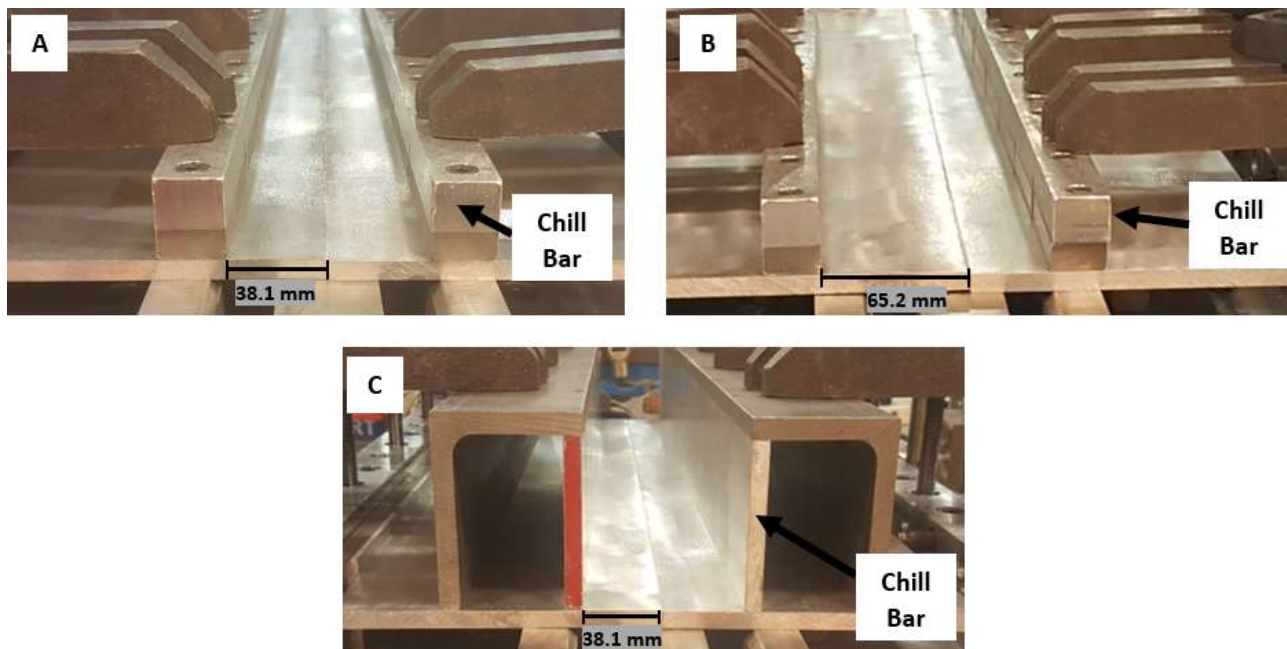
Variation of FSW fixture employed during experimentation: A) Nominal FSW fixture configuration, B) FSW fixture with chill bar offset, C) and FSW fixture with alternative chill bar assembly.
